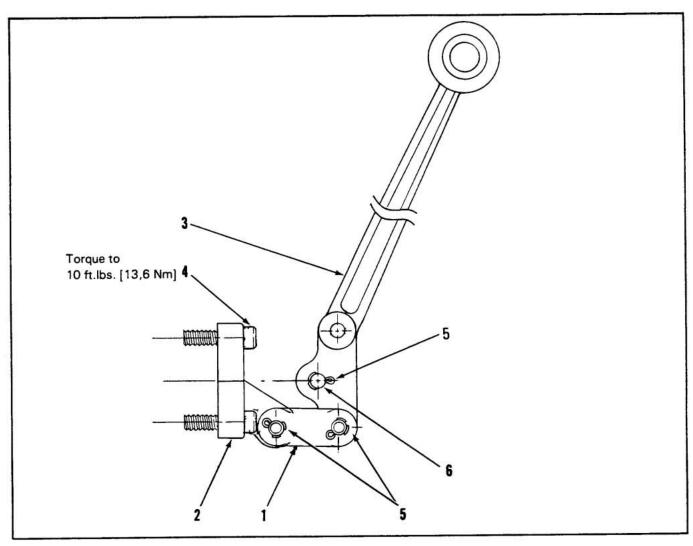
Optional Vertical Handle and Bracket Assembly.
